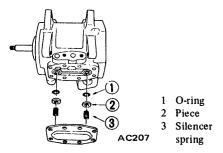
Exploded view of silencer spring, pieces and O-ring
